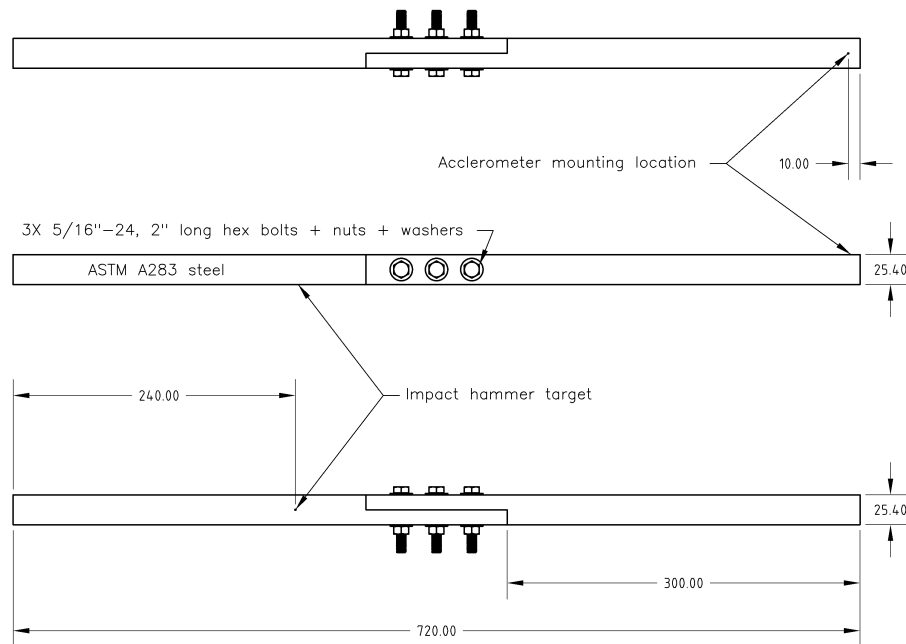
Brake-Reuß beam test specimen, dimensions in mm.
